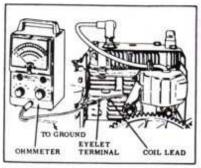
View showing an ohmmeter connected for resistance test of ignition generator coil.
